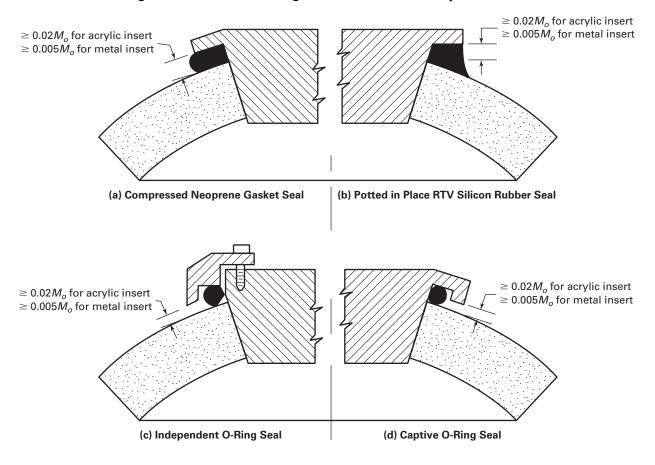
Seal Configurations for Inserts in Acrylic Windows
